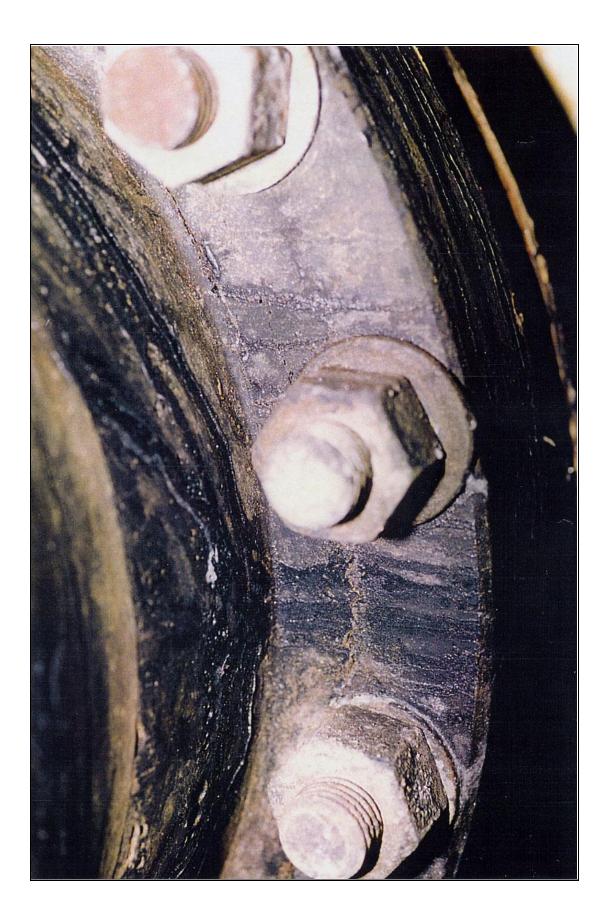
Crack, in flange root. Crack in flange root (propapbly caused by overtorquing bolts). Flange root cracking is located at a greater radial distance than is adhesive bondline;
